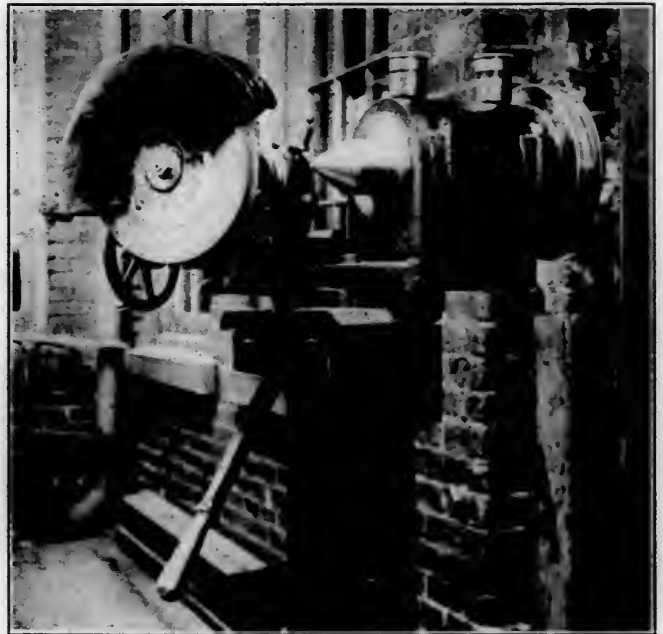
LATHE CENTER GRINDING MACHINE.
